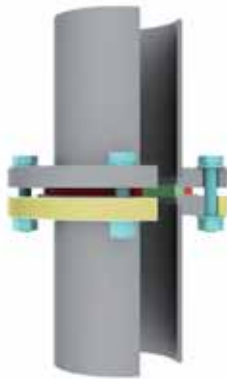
ISO-K flange with bolt ring mounted on ISO-F flange with centering ring and screws
